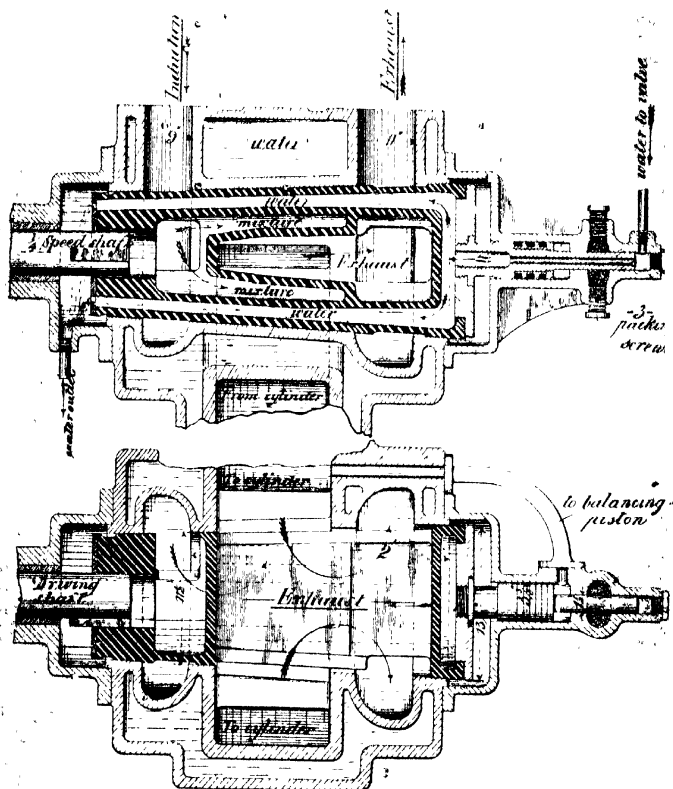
Details of water-cooled balanced rotary admission and exhaust valve for a 30-in. double-acting gas engine.
